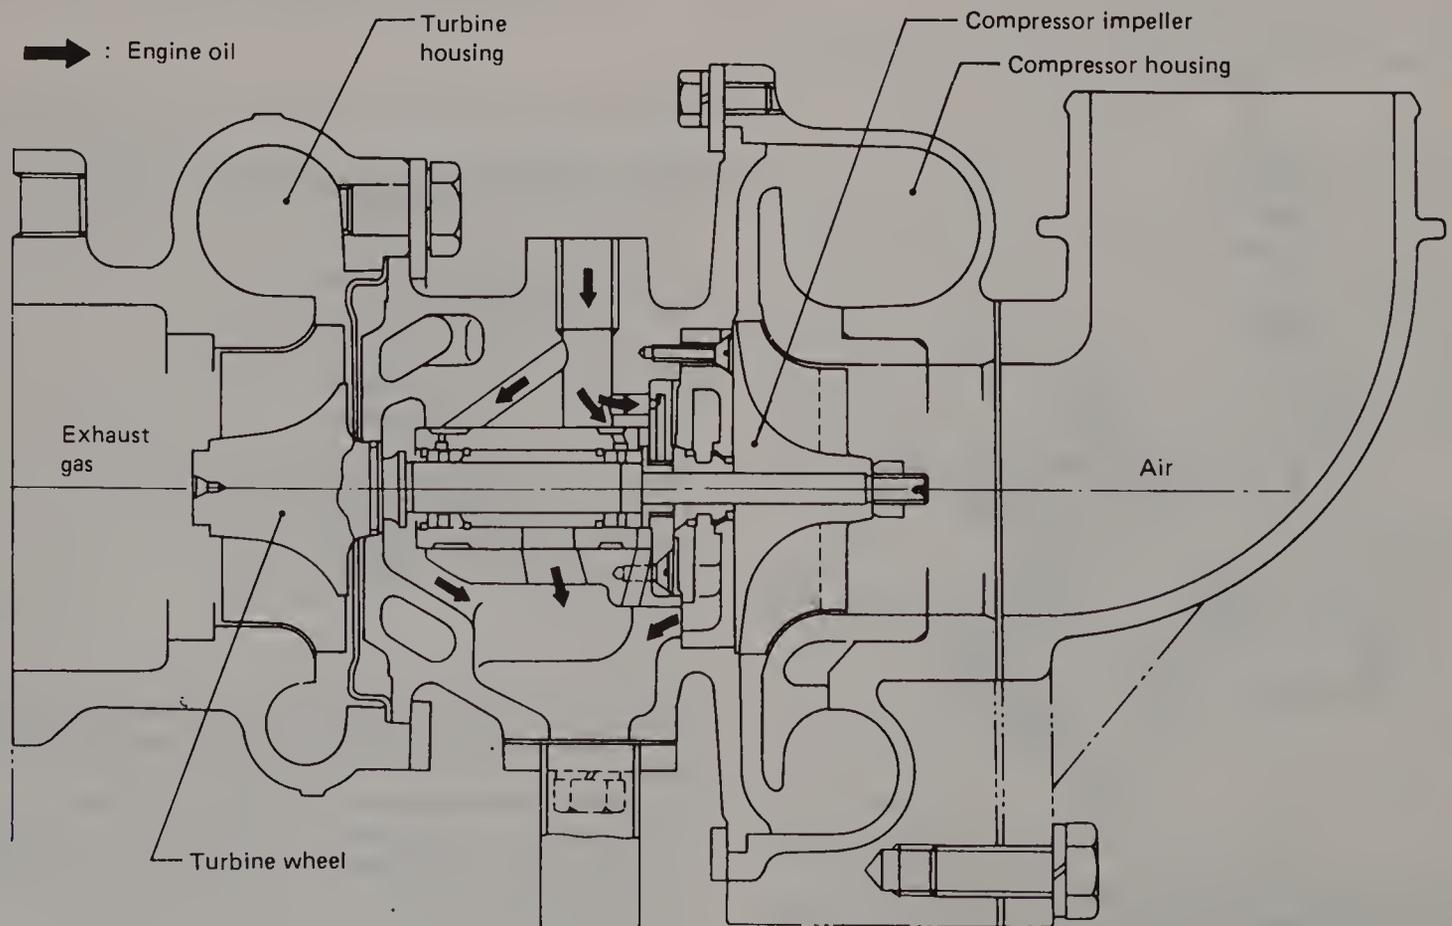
Cross-section view of turbocharger assembly indicating the location of the compressor impeller (Sec 7)
